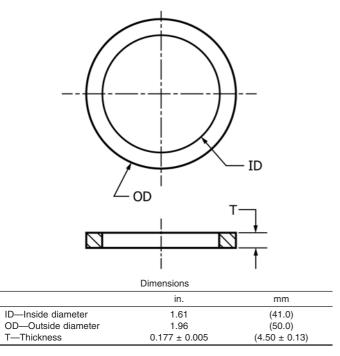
Typical PM Ring Test Specimen for Measuring Magnetic Properties
